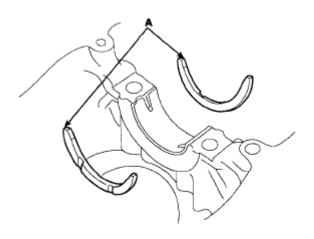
Aligning Bearing Claw With Claw Groove Of Cylinder Block Courtesy of HYUNDAI MOTOR CO.
